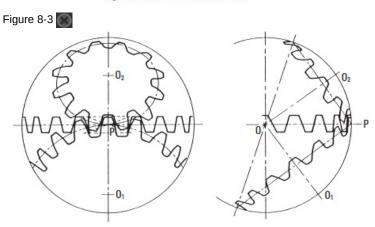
Meshing Bevel Gear Pair with Conjugate Crown Gear
